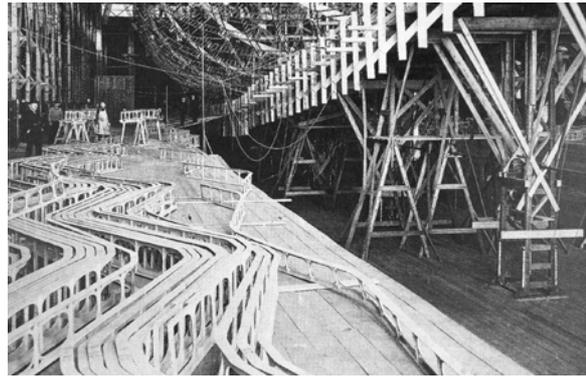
Form of plywood girder used in the construction of the lattice-shell airframe of SL-1. (Meyer²)
